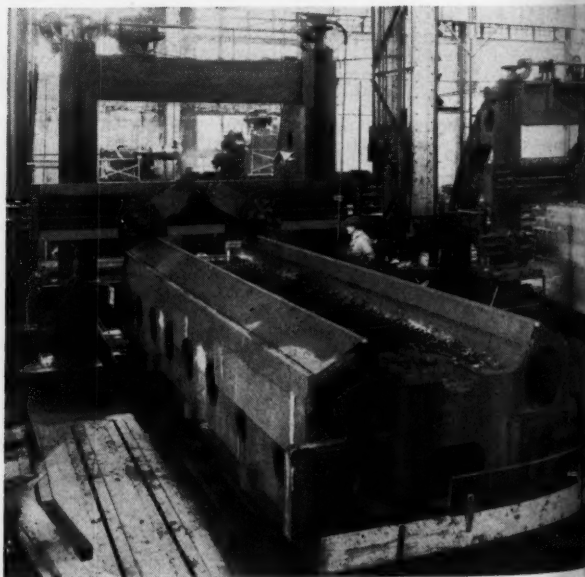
Planing the bed ways of a base plate casting for a 3,500-ton extrusion press.
